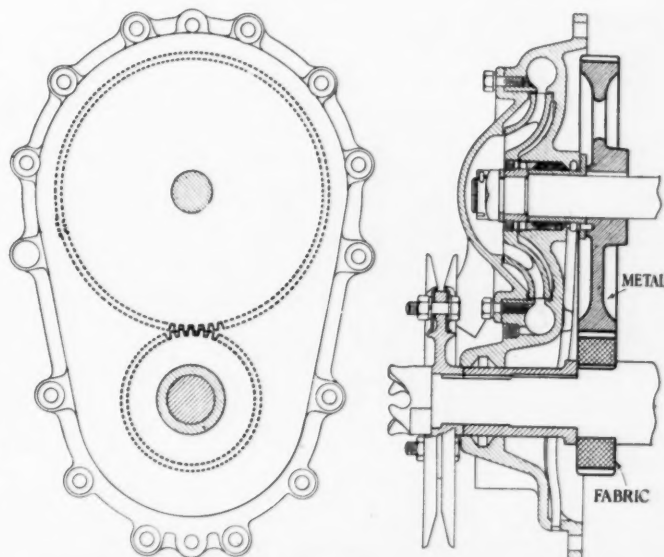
Typical fabric gear drive as used on the Oldsmobile
